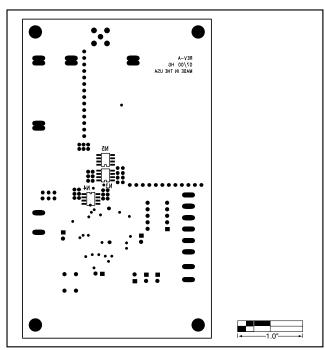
MAX1855 EV Kit Component Placement Guide—Solder Side
